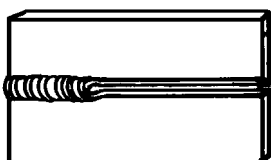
Horizontal weld / Liggande vertikalsvets
